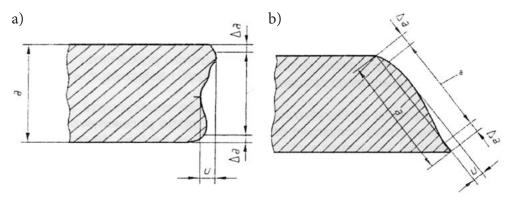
Determining a measurement range for the tolerance of perpendicularity and inclination; a) perpendicular cut, b) bevel cut
